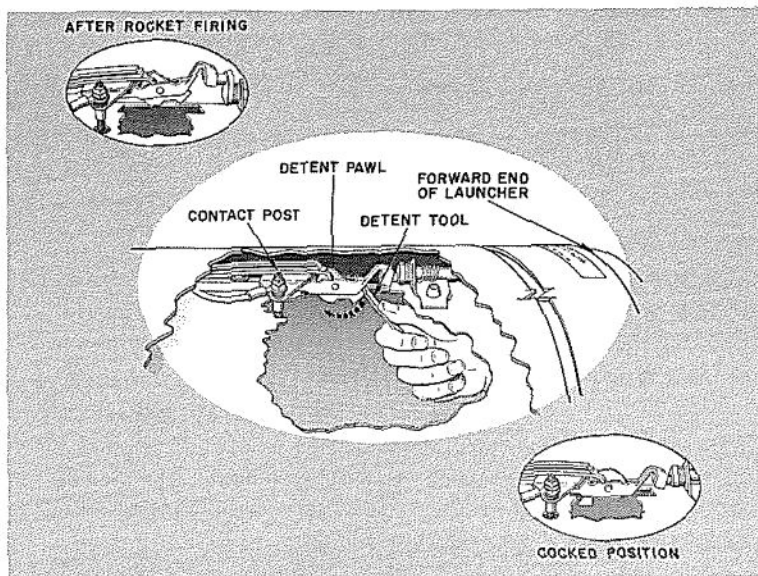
Cutaway of Launcher Tube Showing Method of Detent Re-Cocking After Rocket Firing.
